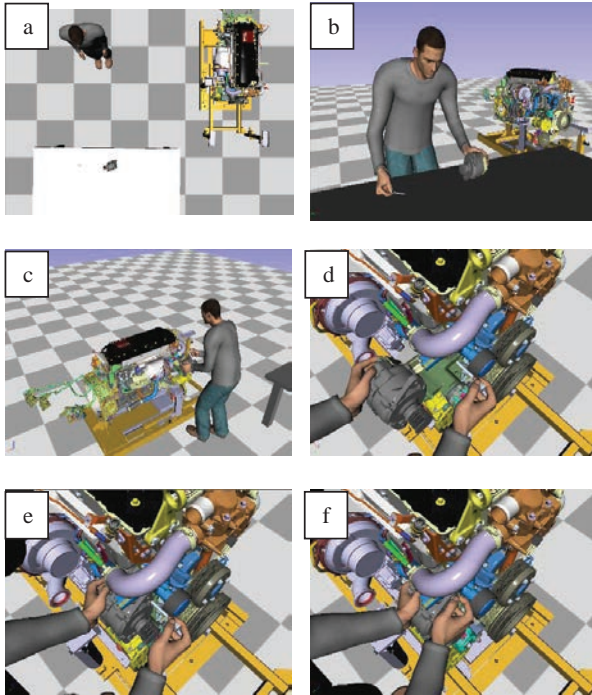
(a) the starting of the assembly; (b) the manikin walks to the table and picks up the alternator and a screw; (c) the manikin walks and places the alternator into assembly position; (d) a close up of the assembly; (e) the alternator is mounted to the engine; (f) the screw is mounted to fix the alternator. Courtesy AB Volvo.
